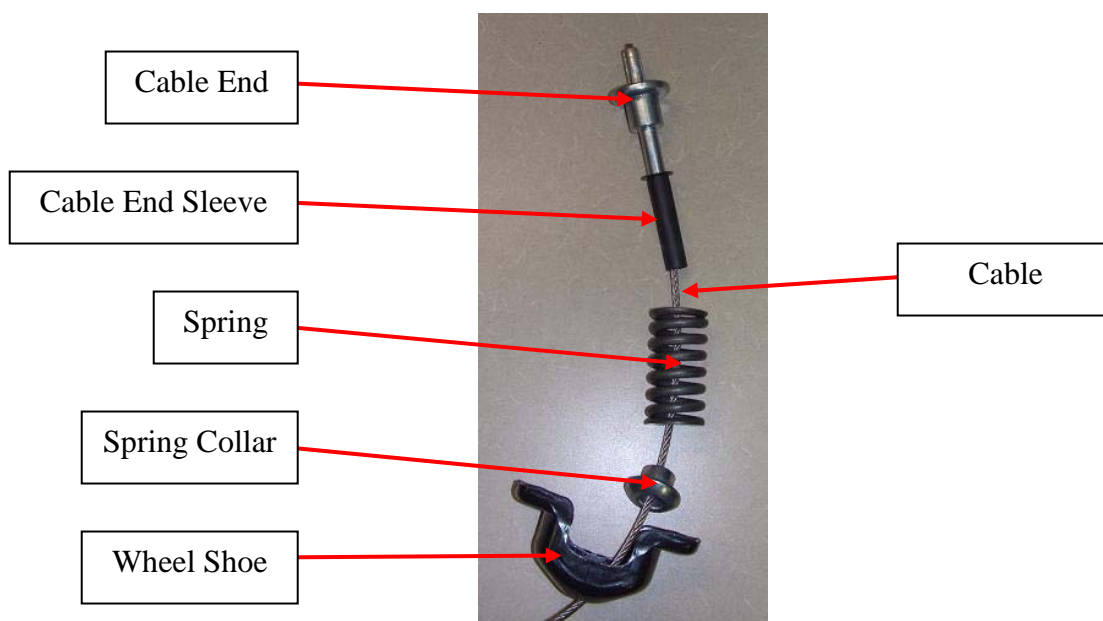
Close up of Wheel Shoe End of Cable (Exploded View)
